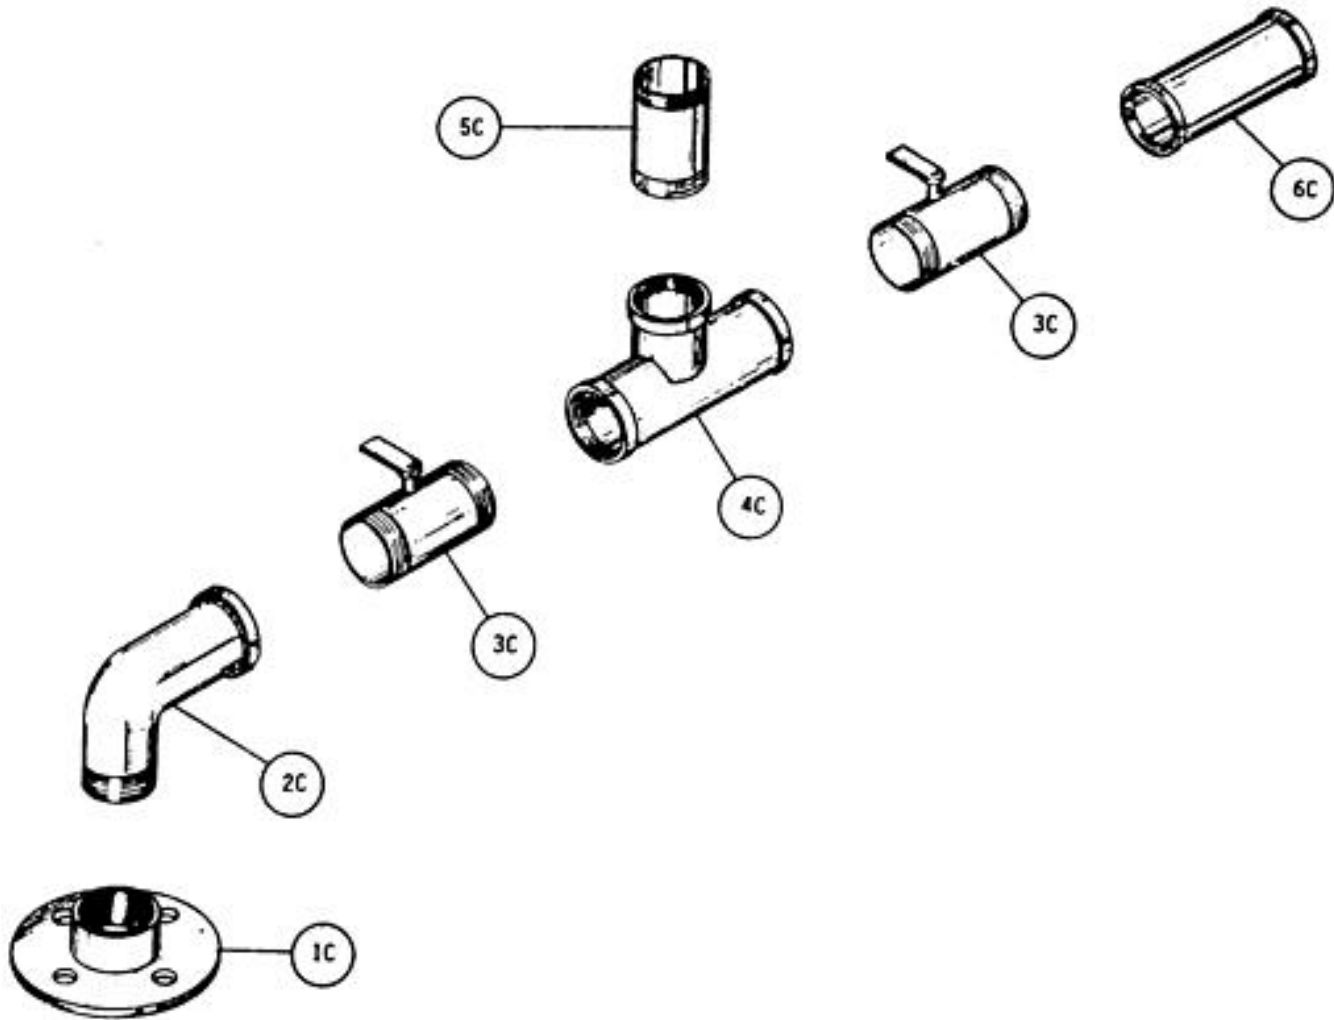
Exploded, schematic diagram of the carbureting unit and control valves.
